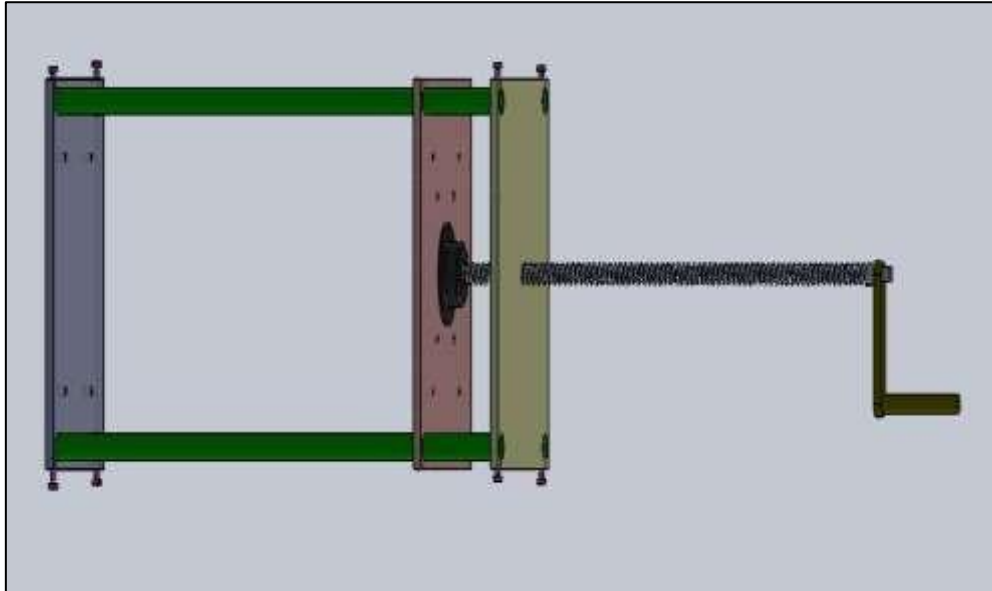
Assembly of casting mechanism (opening/ closing).
